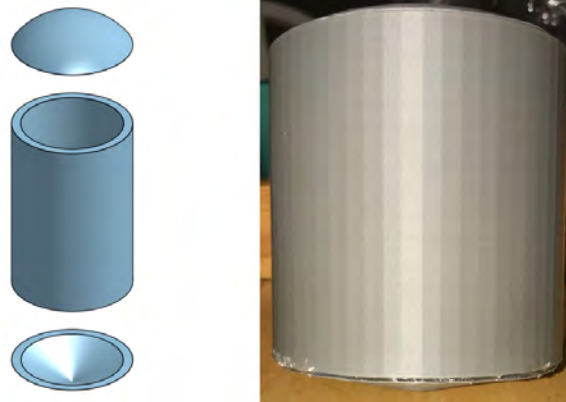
CAD design and 3-D print of the Pill shell shape.
